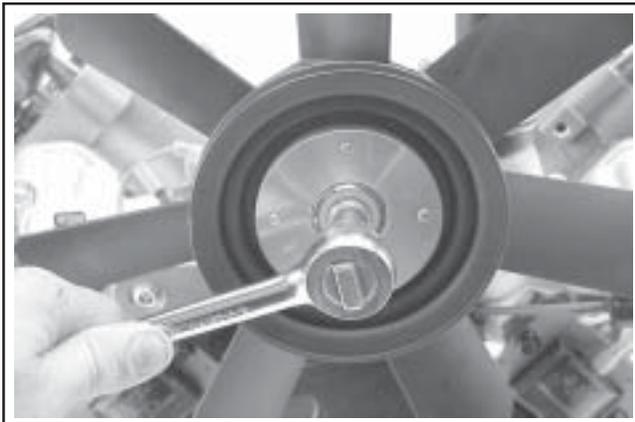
Removing Front Flange Nut and Flat Washer.
